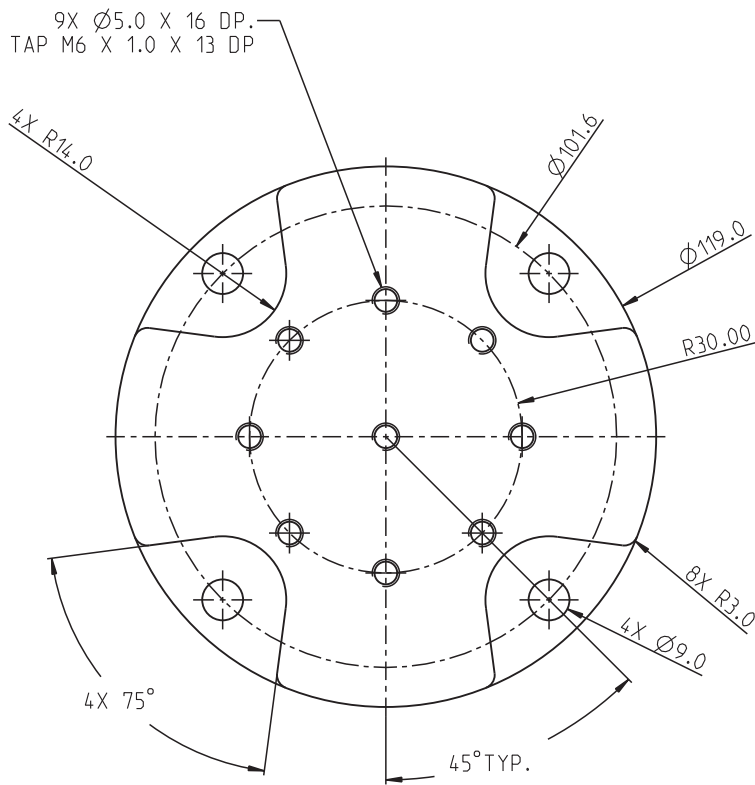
EXS-ADPT Mount Bolt Hole Pattern
